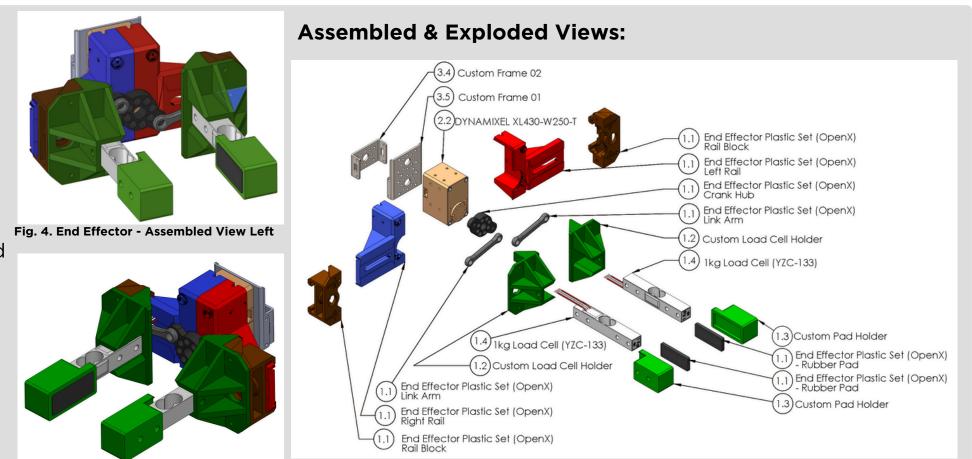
End Effector - Assembled View Right Fig 6. End Effector - Exploded View
